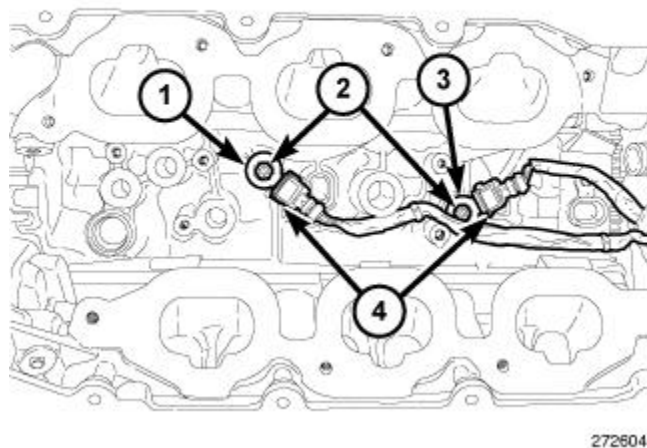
Forward Knock Sensor & Rear Knock Sensor
